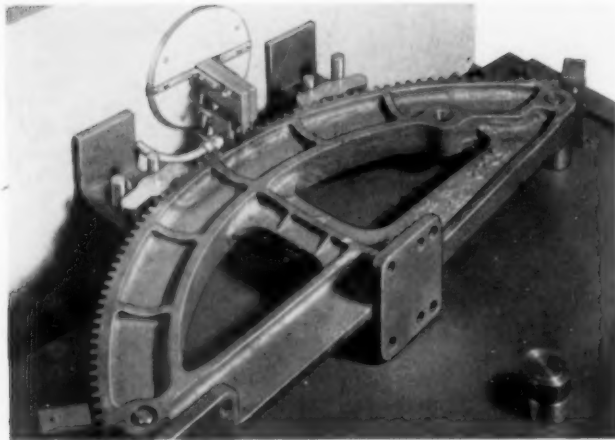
A close-up view of fixture, coil and table for hardening teeth of segment in Fig. 11, showing pawls and dentents for index alignment.
